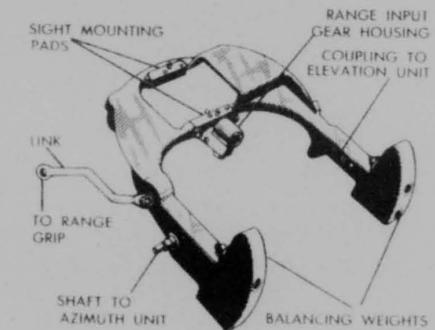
Yoke Assembly, Ring Type Sighting Station.
